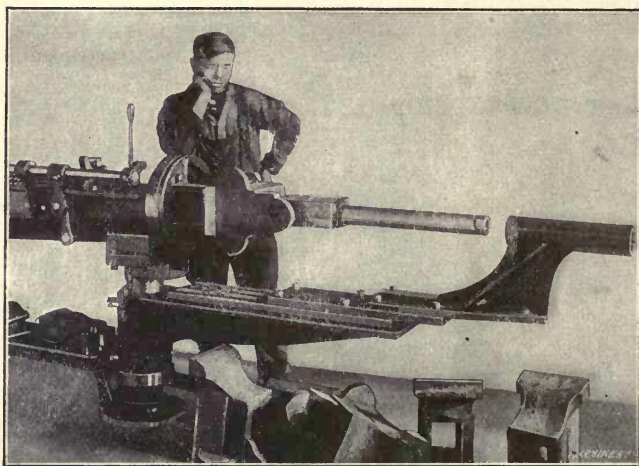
Broaching Machine Finishing Rectangular Hole in Vise Body
